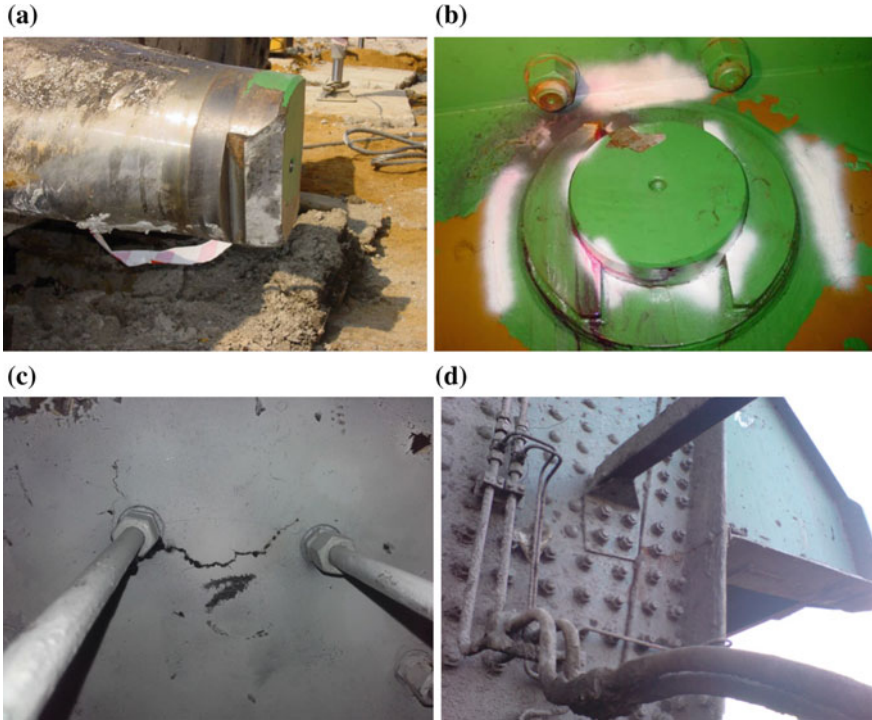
Examples of damage: a damaged end of crawler frame half-axle; b end of the half-axle before damage; c fracture of the spherical cup of the supporting ball in the frame support of a spreader's tracked undercarriage; d fracture in the attachment area of the excavator's non-steering frame
